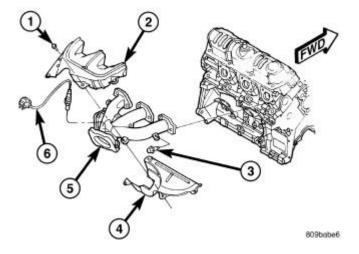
EXHAUST MANIFOLD - RIGHT Courtesy of CHRYSLER LLC
